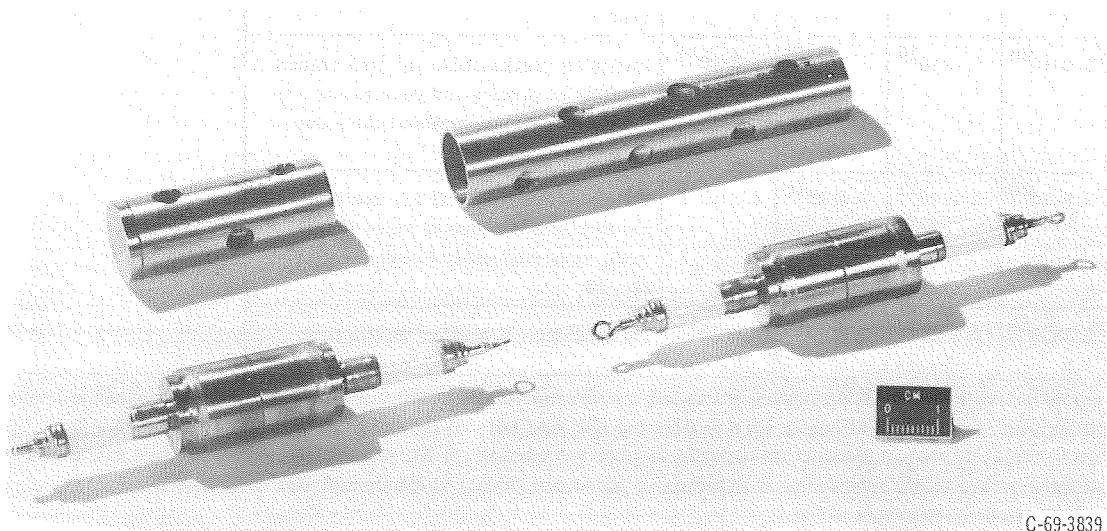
Ceramic insulator seals and stainless-steel parts which make up one capsule of the multiple-capsule assembly.
